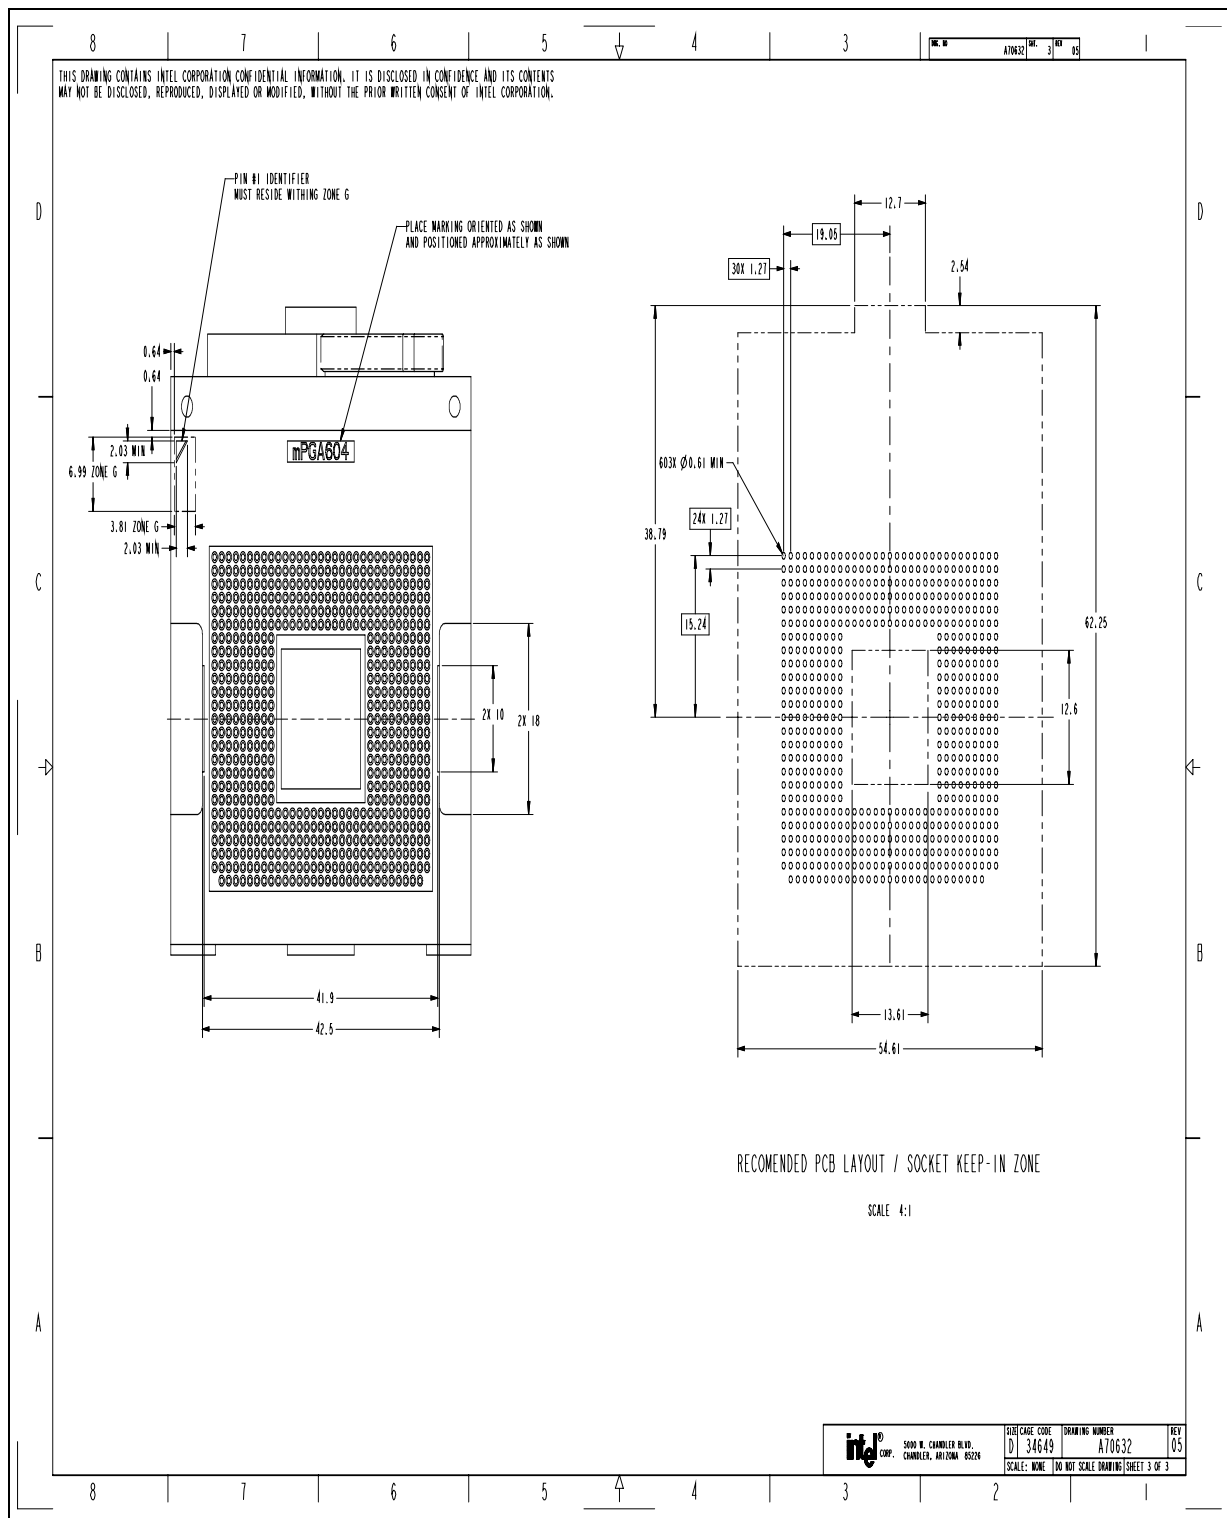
mPGA604 Socket Drawing with Dimensions (Continued)
